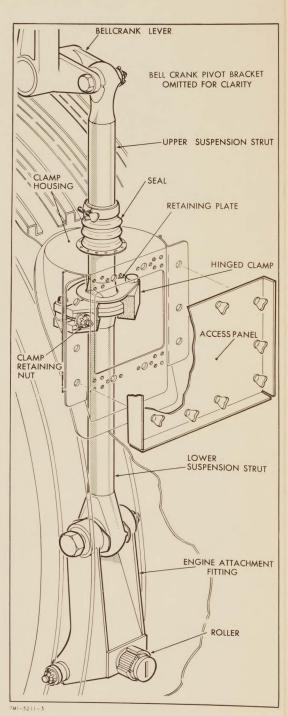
ENGINE SUSPENSION - REAR INBOARD
